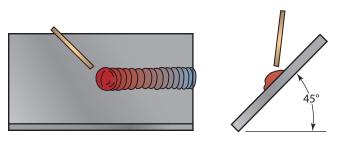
Horizontal stringer bead at a reclining angle.
